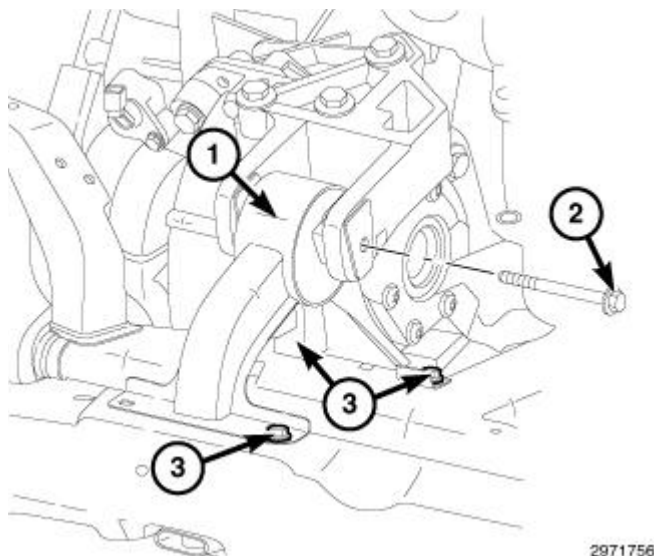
Rear Engine Mount, Rear Mount Through Bolt & Bolts
